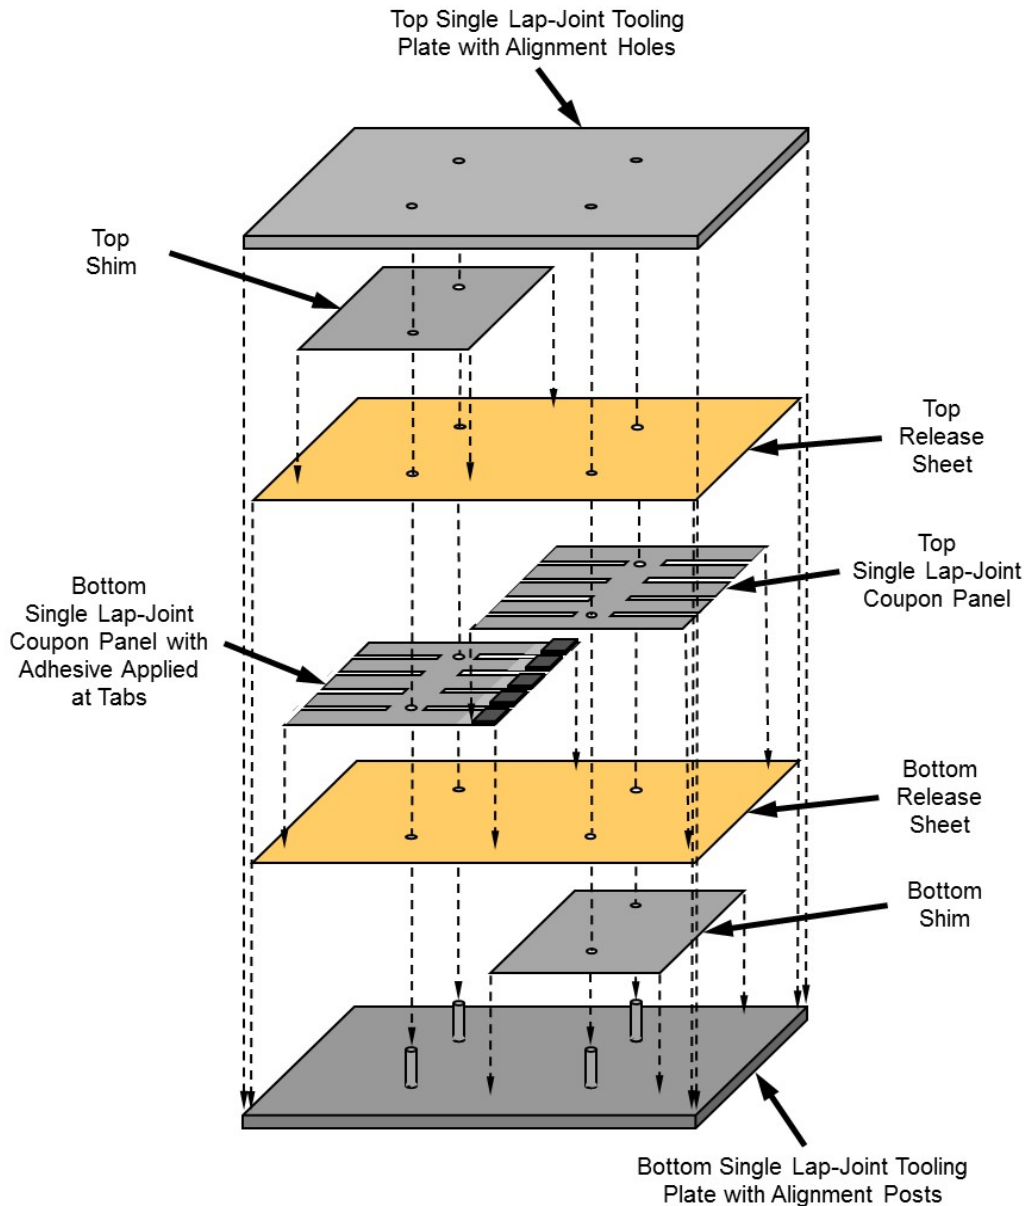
Stacking assembly for fabrication of single-lap-joint panel
